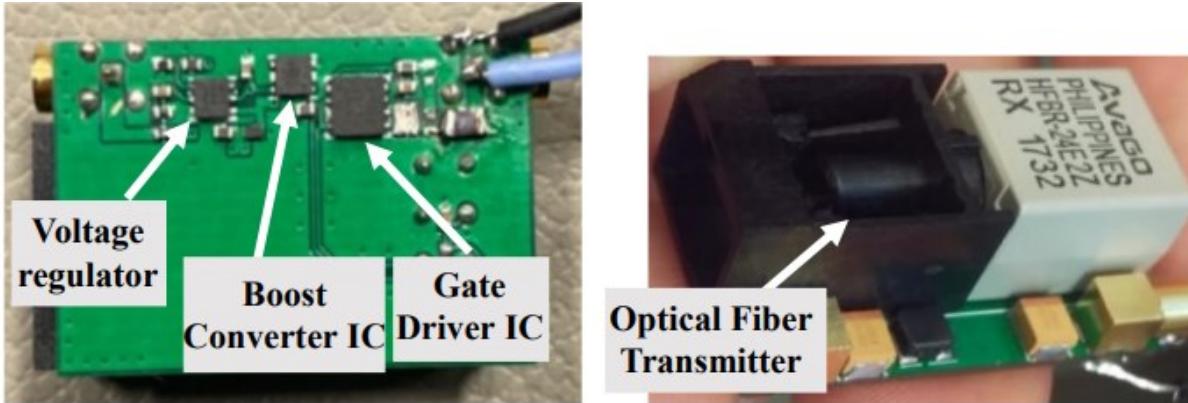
(b): HV Optically isolated Gate Driver (17 mm X 12 mm) (L) Bottom Side PCB (R) Top Side PCB
